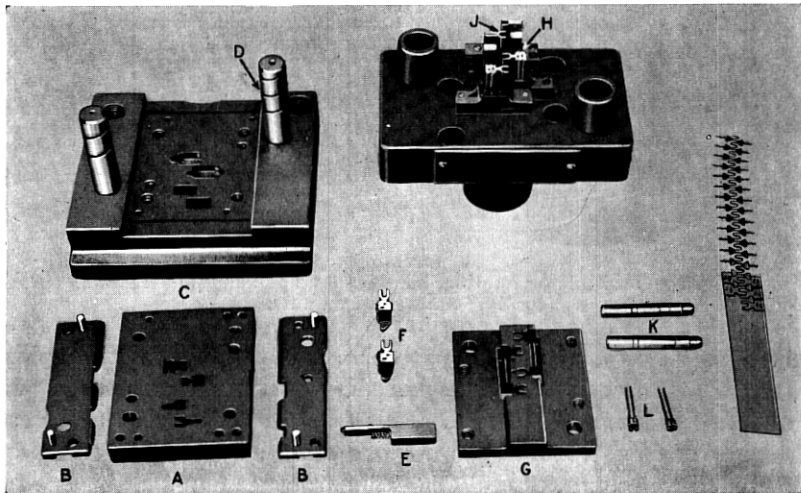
Punch and die for shearing, blanking, and forming solderless cord tip
